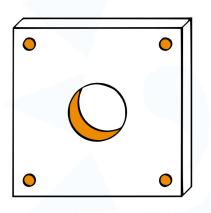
The upper feed stream plate is manufactured on a lathe
